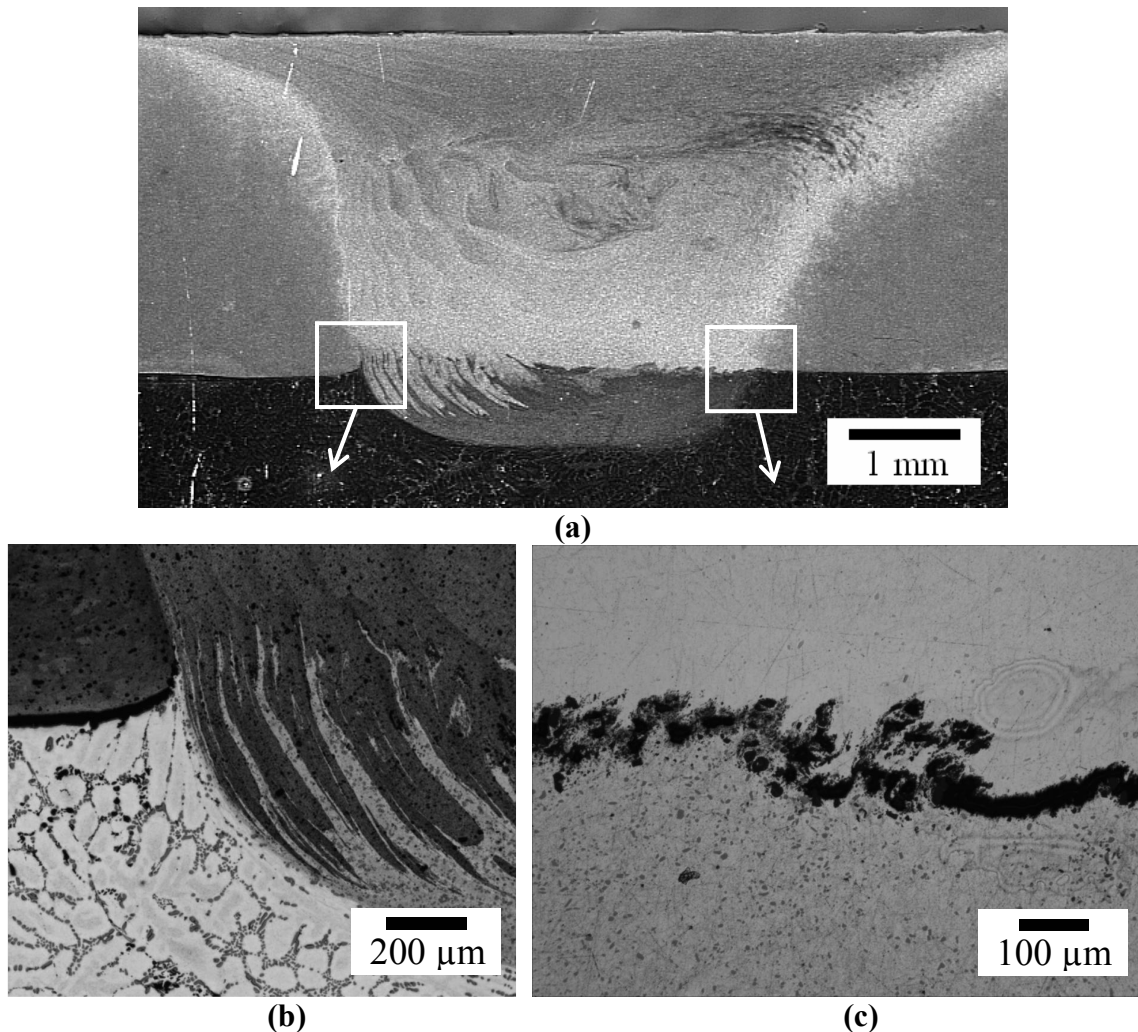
(a) Friction stir welded lap joint cross-section with anodized parts prior to welding. Exploded views of (a) show (b) hook defect at the advancing side faying surface notch and (c) oxide seam defect at the retreating side faying surface notch. Figure from Van Aken et al. [3].
